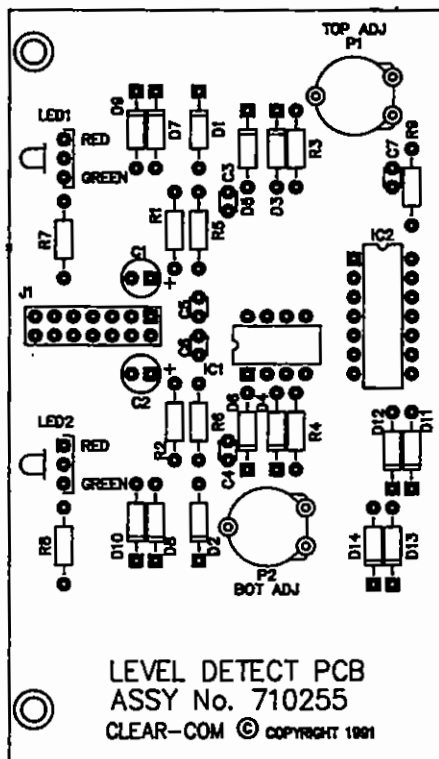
Assembly Drawing - FOR-22 Level Detect PCB, Rev. B
